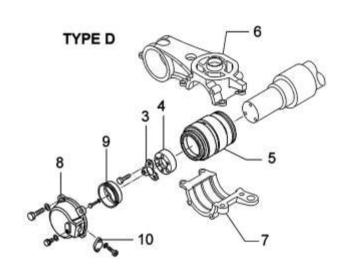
Equipment Layout On Bogie Axle Bearing
